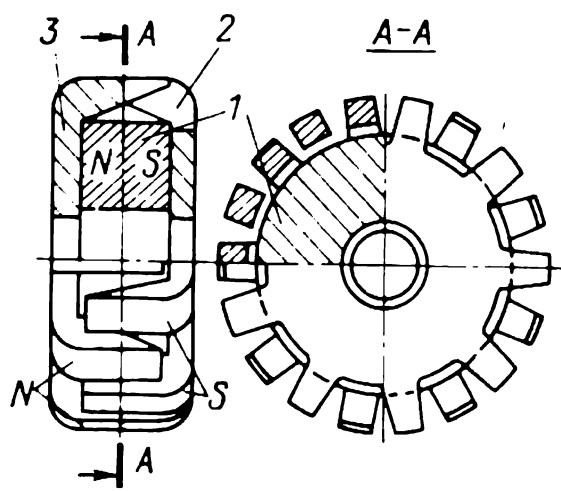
Permanent-magnet-excited claw-pole rotor: 1—ring-shaped permanent magnet; 2—S-pole disc; 3—N-pole disc
